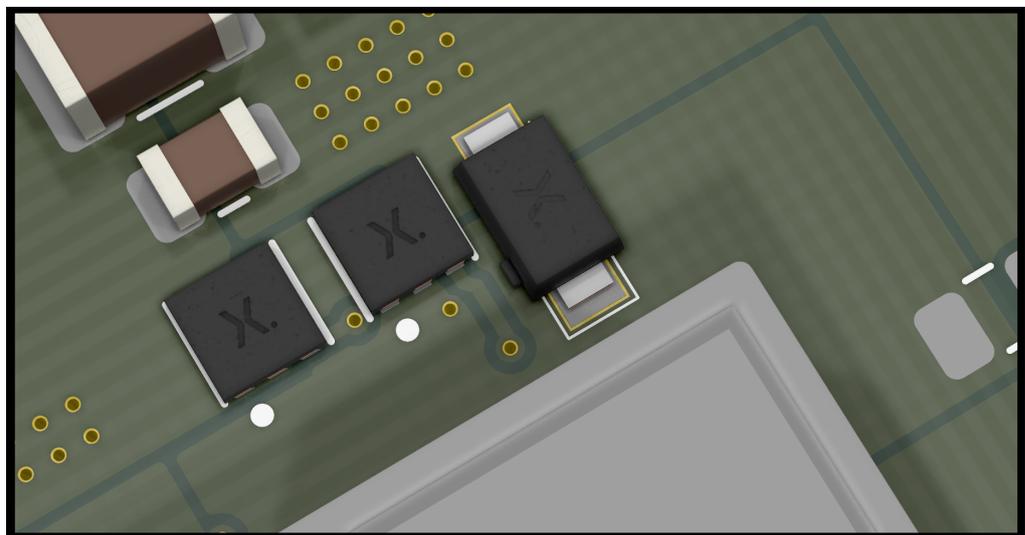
Buck converter PCB layout: top side detail showing MOSFETs and Schottky diode
